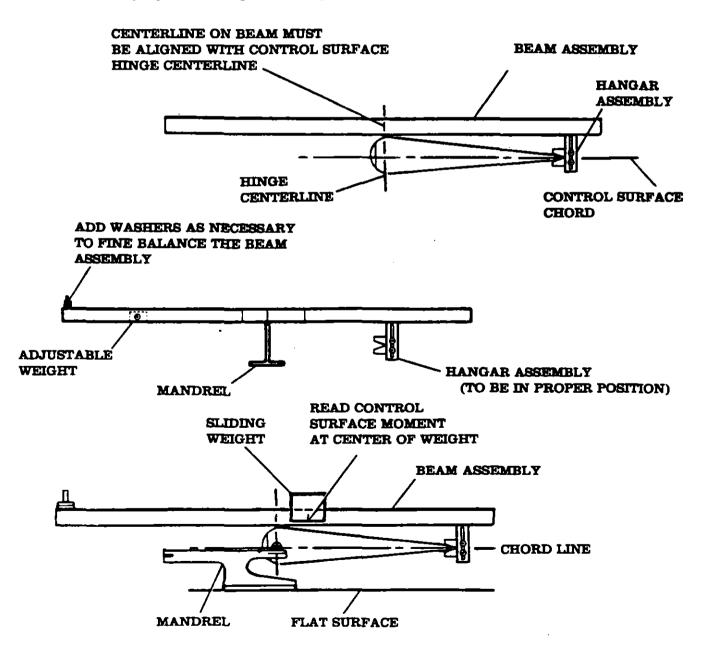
Control Surface Balancing (Sheet 2 of 5)
